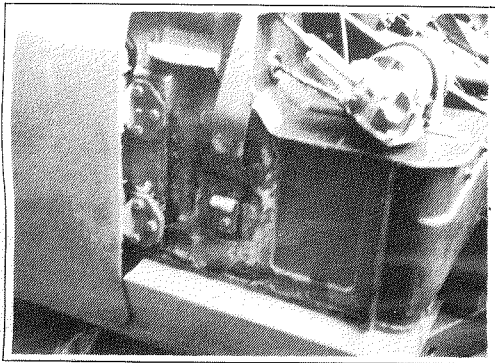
Serious corrosion of the upper part of the A-post will lead to sagging doors and windscreen.
